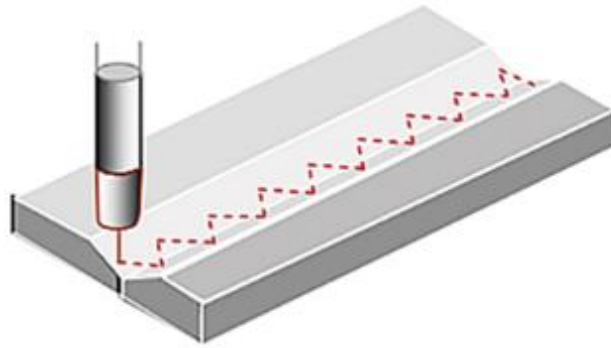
Display of the torch weave across the weld in through arc seam tracking [37]
